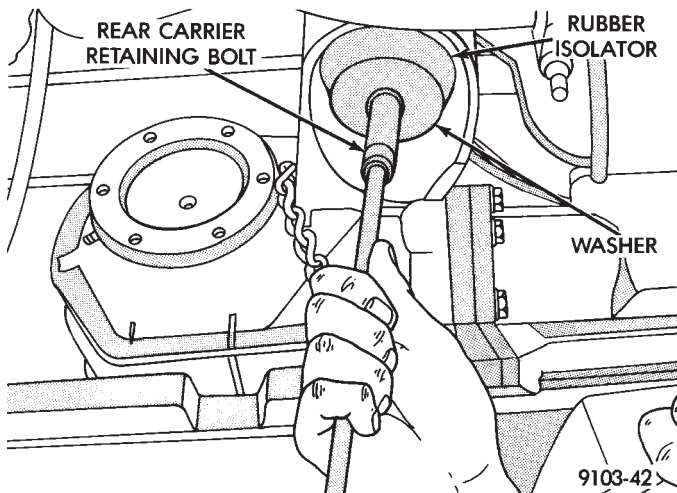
Rear Drive Line Module Assembly Rear Mounting Bolts
